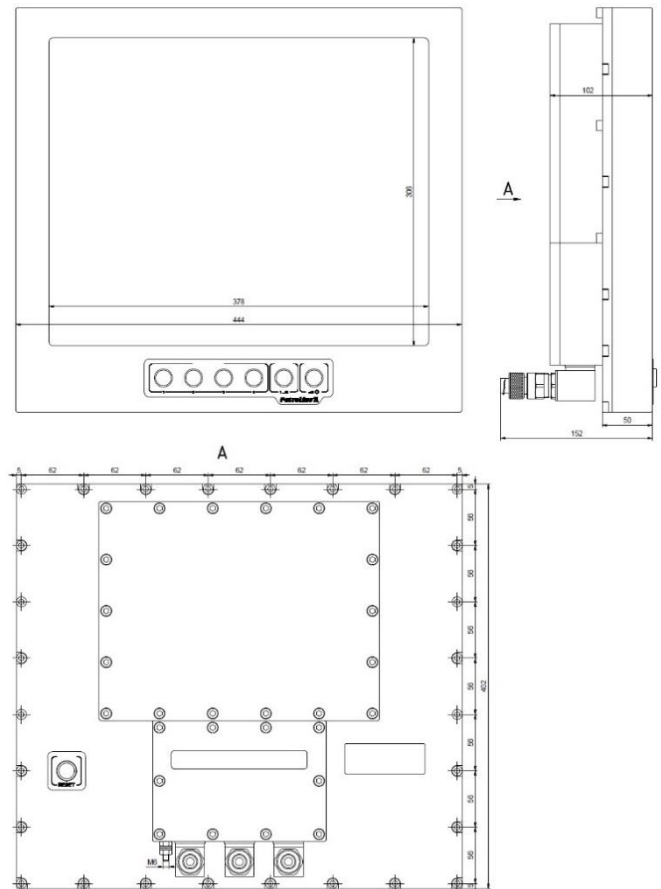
Overall dimensions of the MV-150V3 (panel mount configuration)
